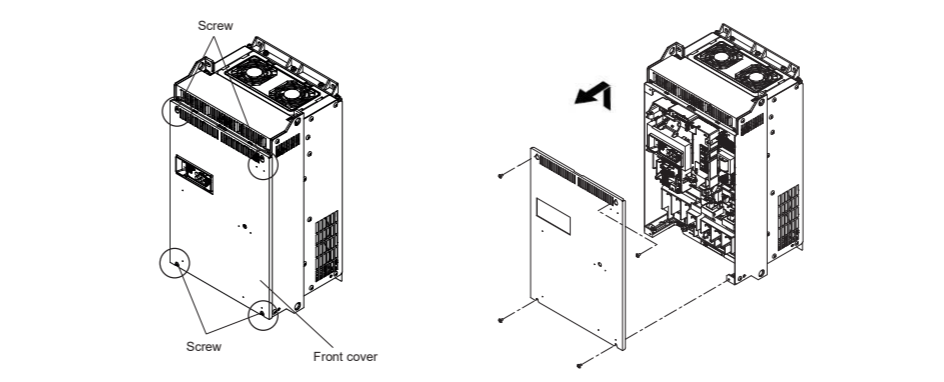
Front cover and wiring guide removal (FRN0060LM3S-4G)
